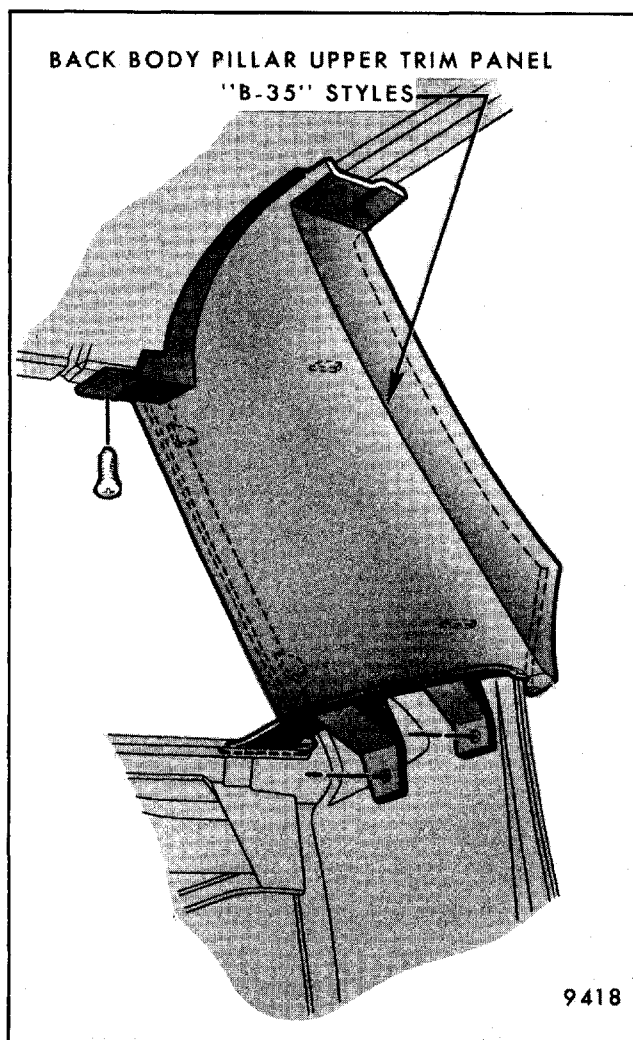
Back Body Pillar Upper Trim Panel - "B-35" Styles
